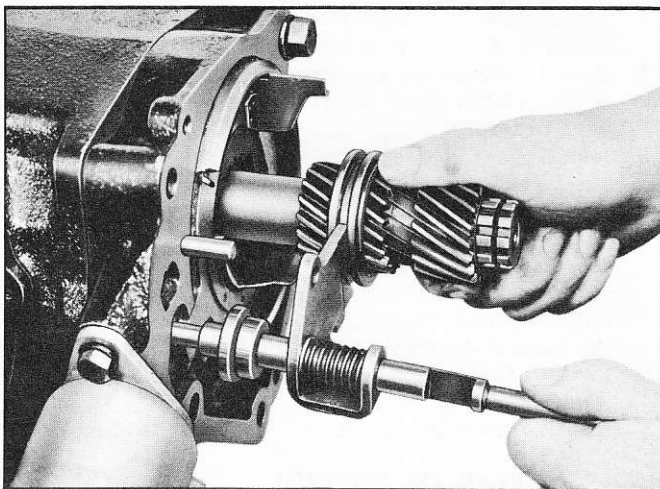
B—Removing Sun Gear, Shift Rail and Plunger Assemblies
